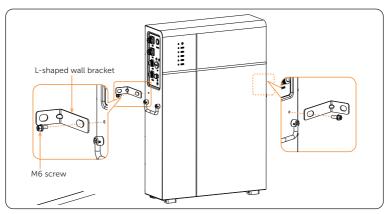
Fixing L-shaped wall bracket to the battery module
